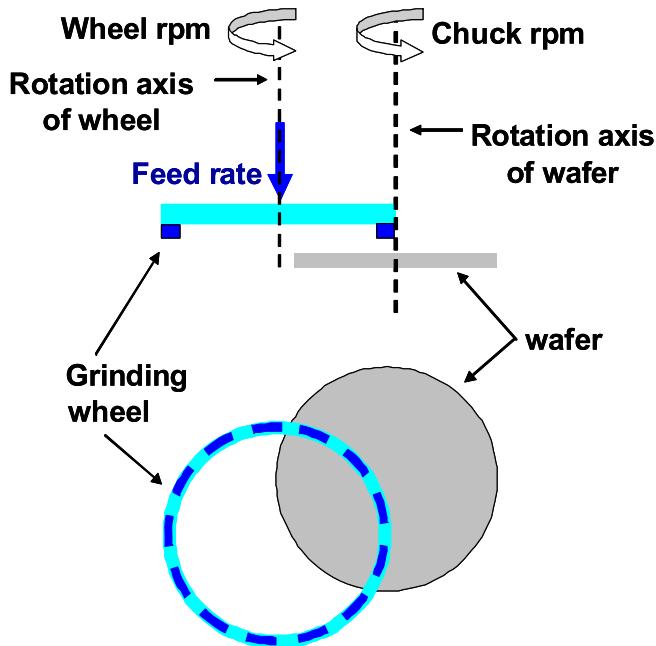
(a) Schematic of grind tool and (b) schematic of grind wheel [106].
